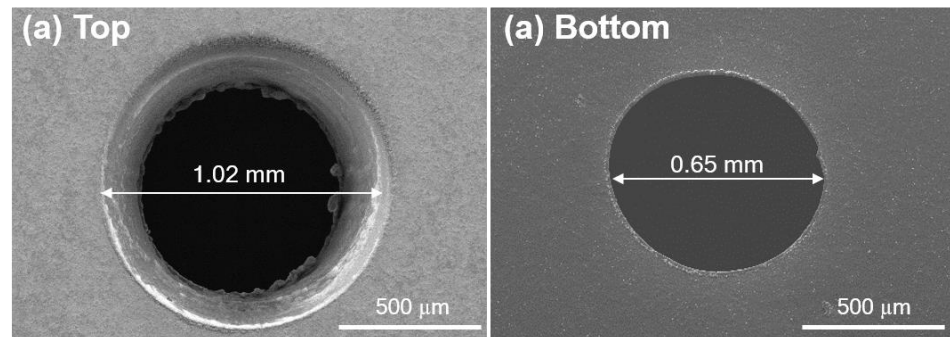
SEM images of a hole fabricated in a 1.6 mm-thick LTCC plate using single side drilling: (a) top and (b) bottom view.
